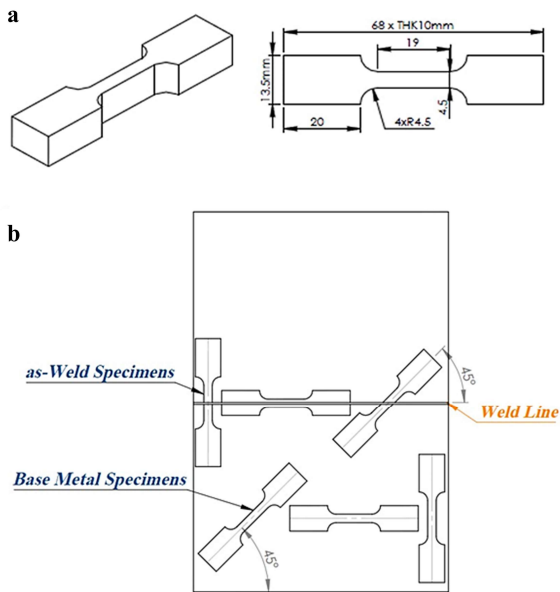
Schematic of (a) the sub-size specimens used for the tensile test, (b) position and angle of the welded specimens and the cut base metal for the tensile test relative to the weld line.
